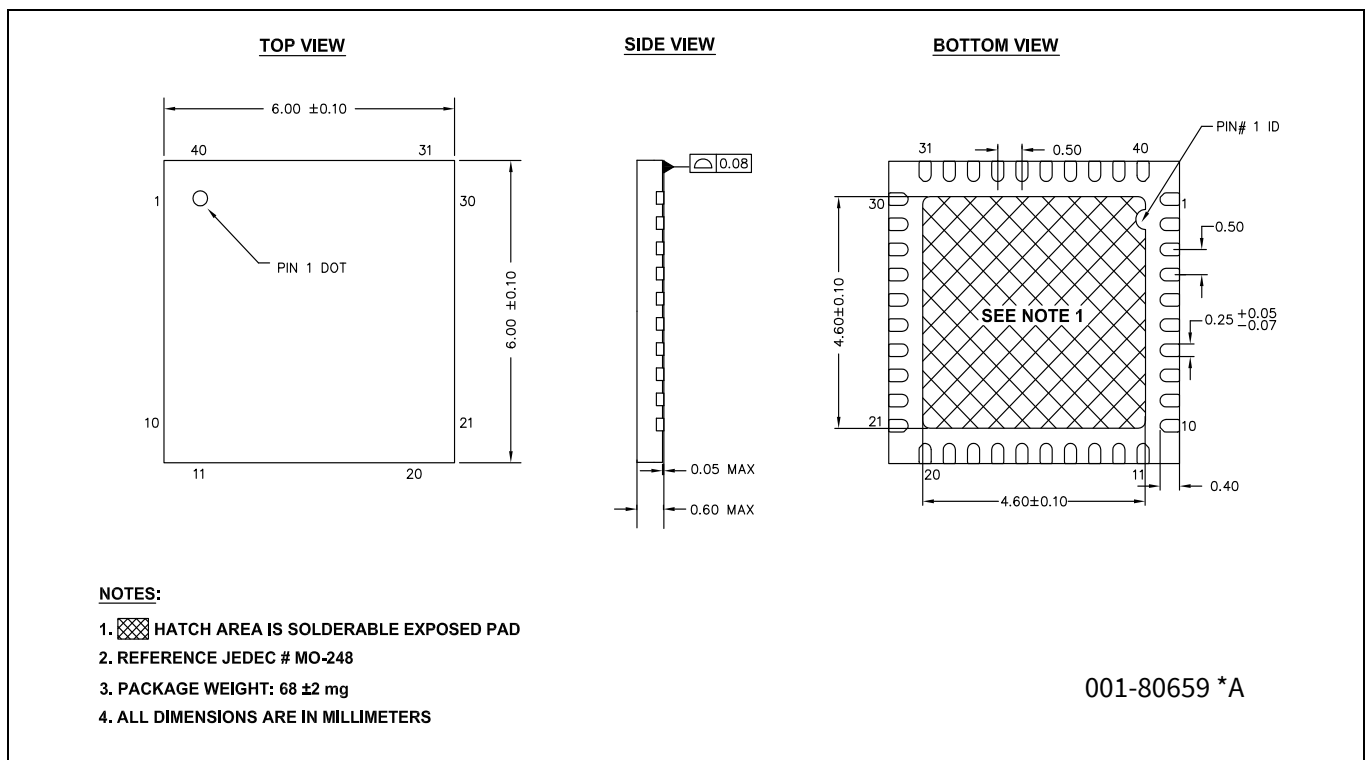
40-pin QFN (6 × 6 × 0.5 mm), LR40A/LQ40A 4.6 × 4.6 E-PAD (Sawn) package outline (PG-VQFN-40), 001-80659
